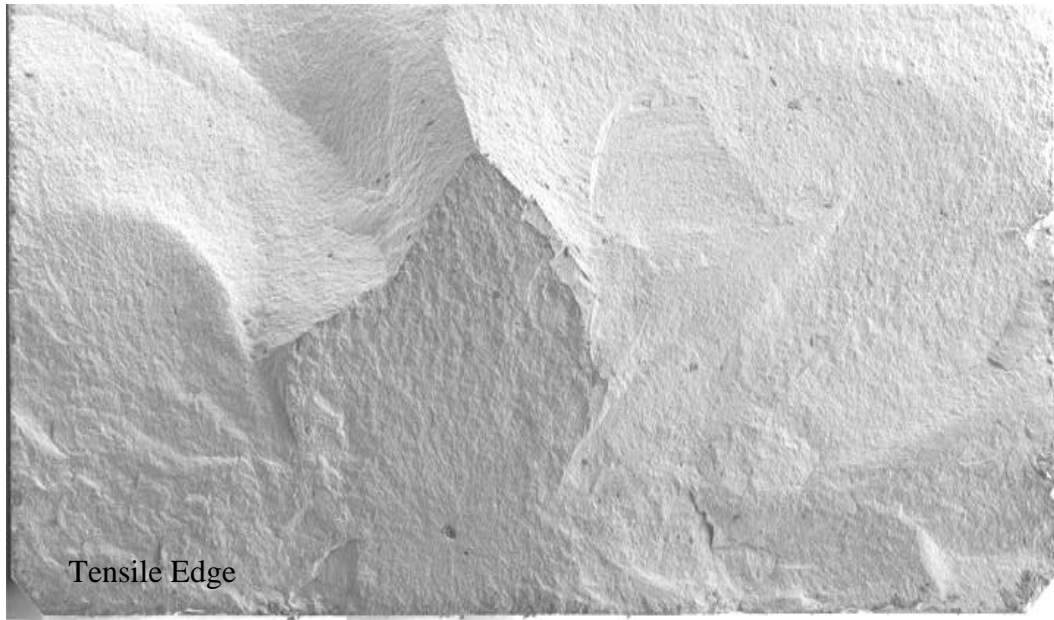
Bar I, fracture surface end faces; composite image, 200× magnification
